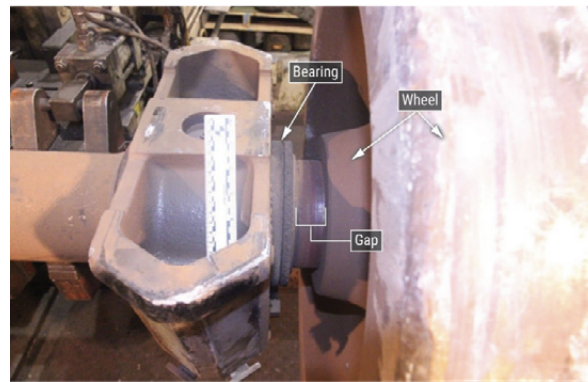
Closeup photo of the gap between the right-side wheel and bearing on wheelset number 4.
